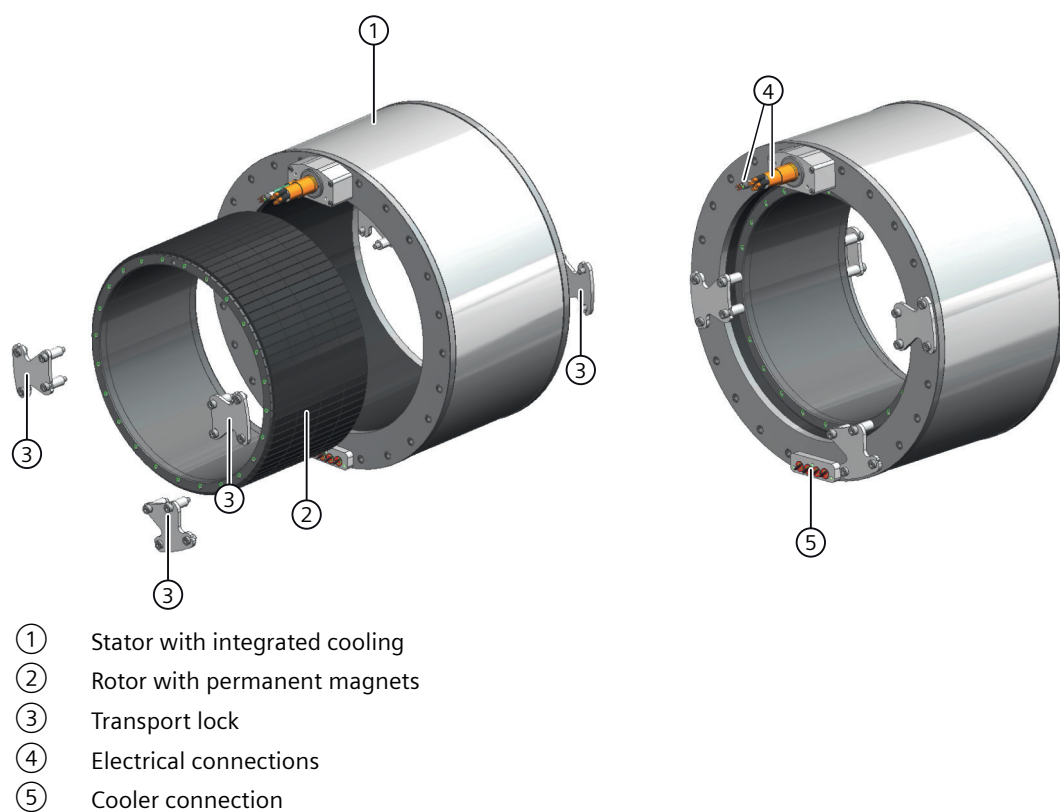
Motor components of the 1FW6160 to 1FW6290 built-in torque motors with integrated cooling (2 cooling circuits)
